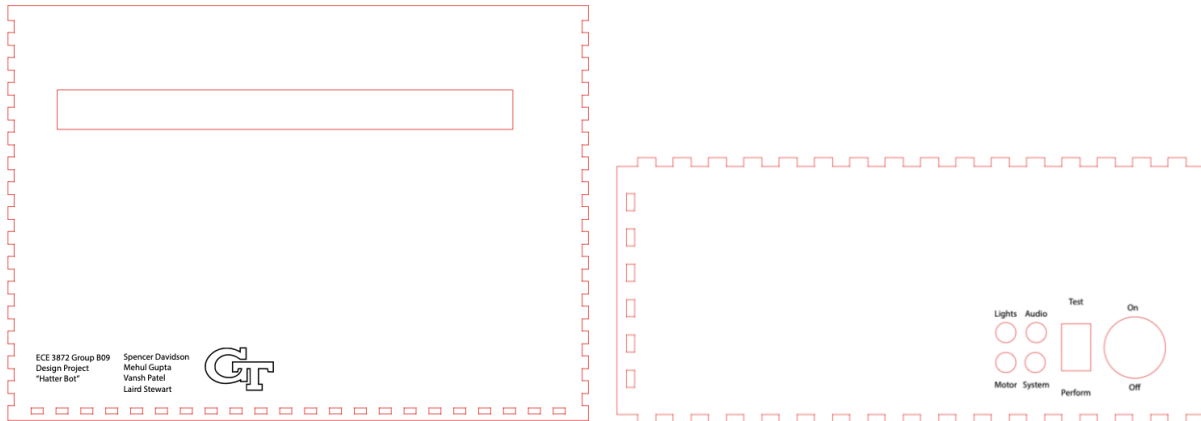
Laser Cut Designs of the Top and Right Faces of the Chassis
